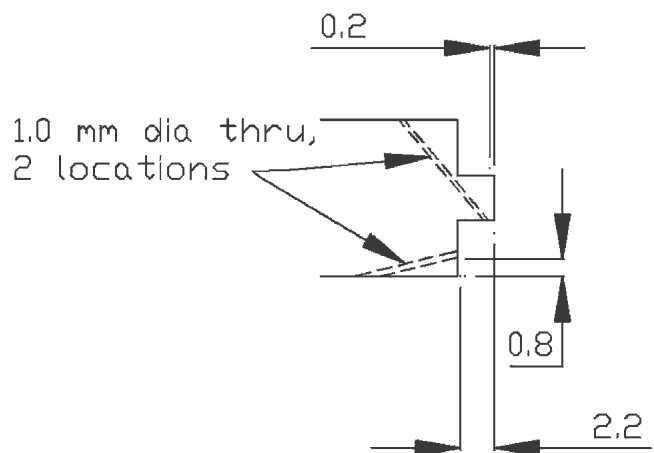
Schematic showing the thermocouple locations in the friction stir spot welding tool (all dimensions are in millimeters).
